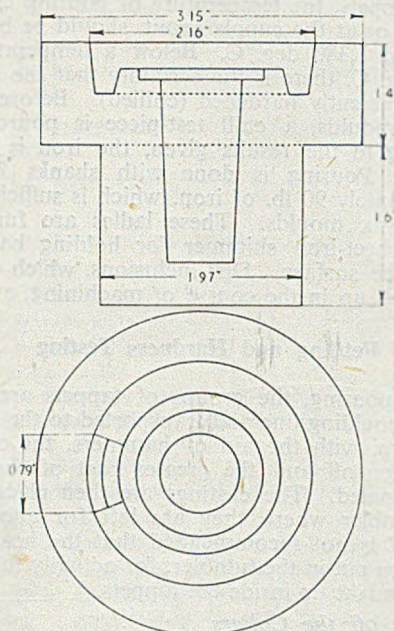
Elevation and Plan View of the Corebox for Tappet Cores.
